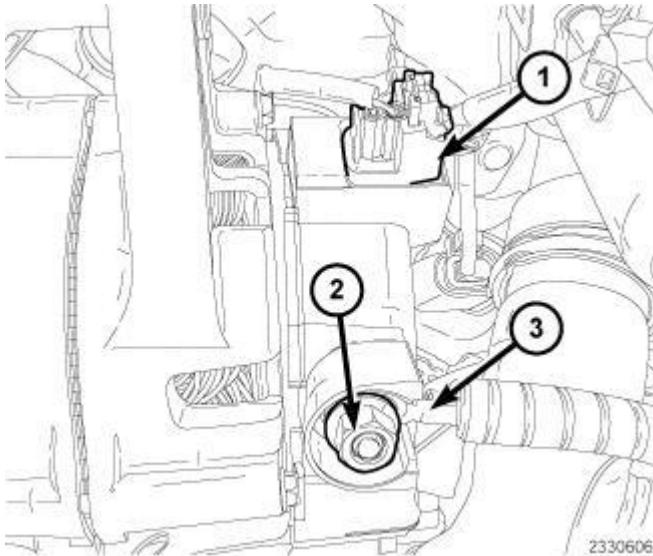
EGR Control Valve Actuator Vacuum Line
